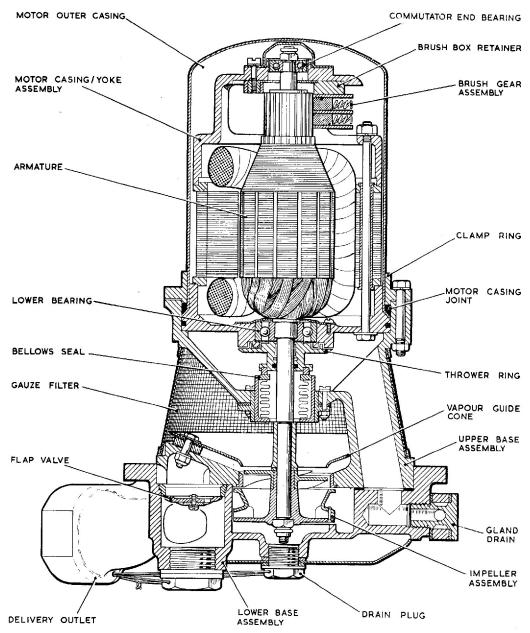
Sectional view of SPE. 1007, Mk. 3 fuel pump
